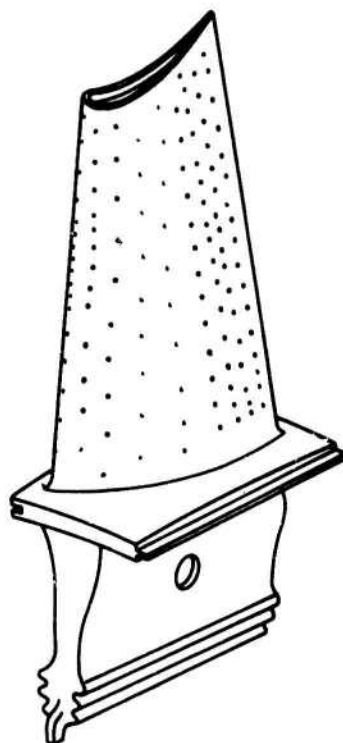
Typical All-Film-Cooled Turbine Blade
